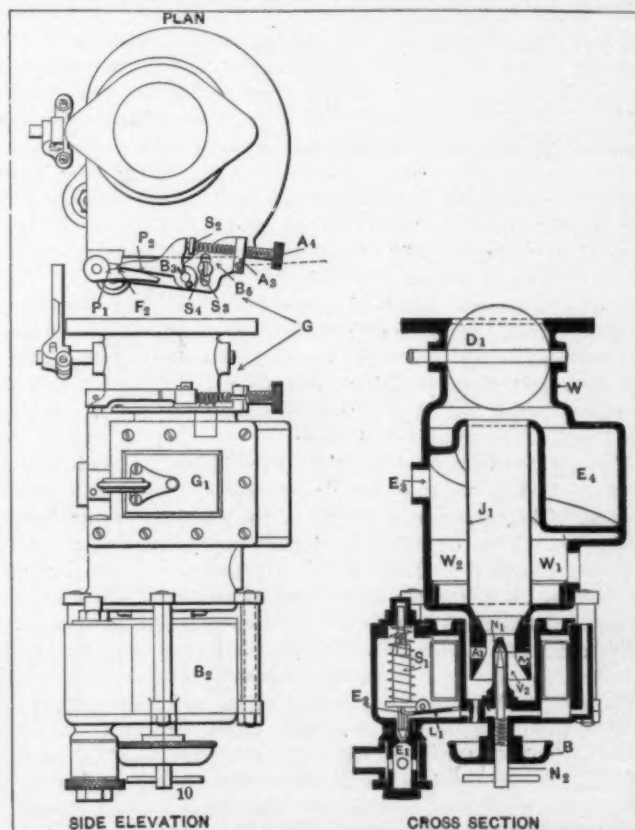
Plan, elevation and section of the Vortex carbureter showing the Venturi tube, tangential ports and snail-like chamber
